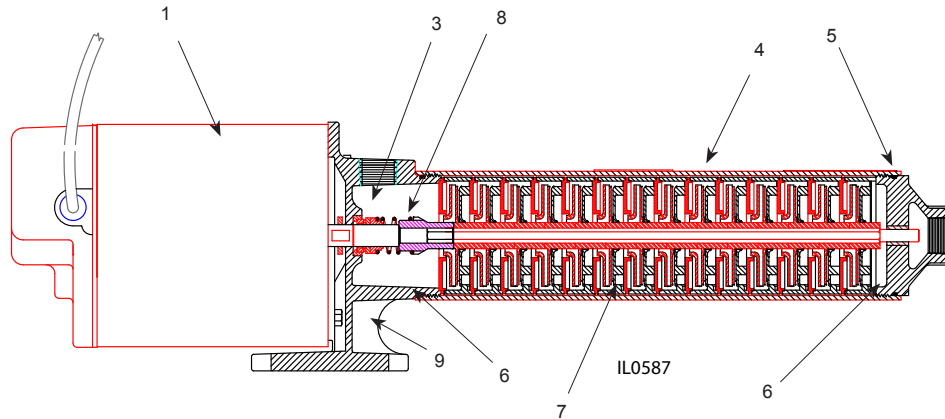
Cartridge Assembly Includes Discharge Bearing, Shaft & Coupling Assembly, Diffuser Plate, Impellers, Diffuser Bearings and Diffusers
